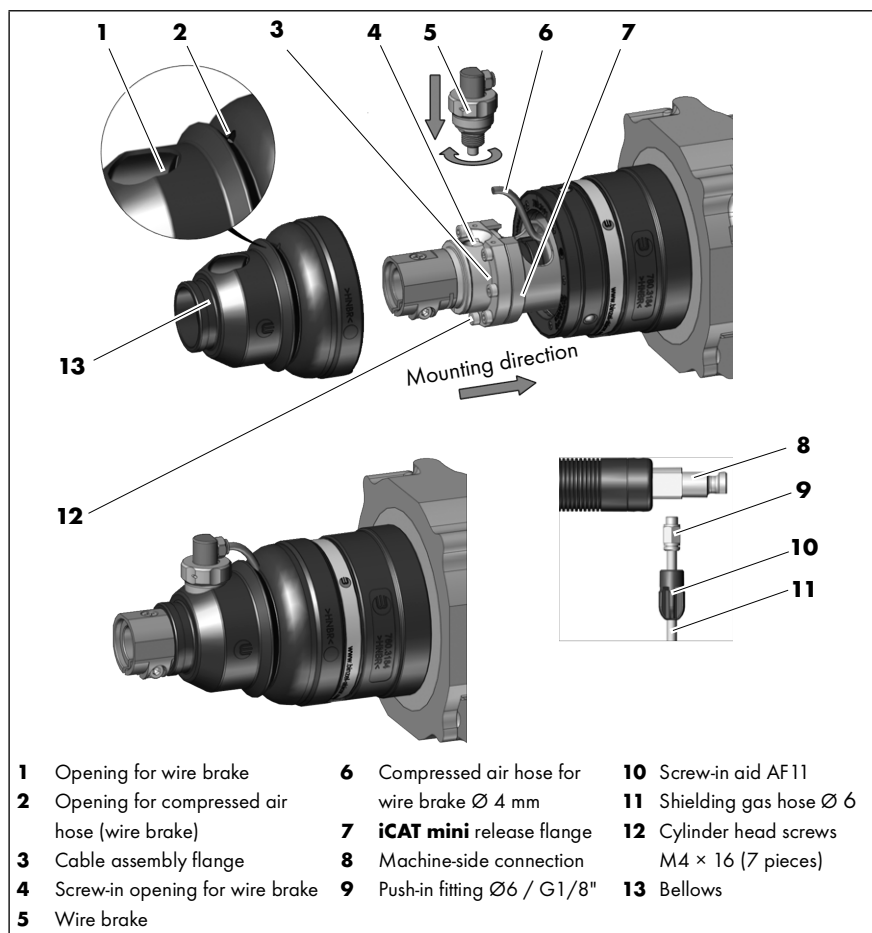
Mounting the cable assembly - iCAT mini for ABIROB® G with wire brake
